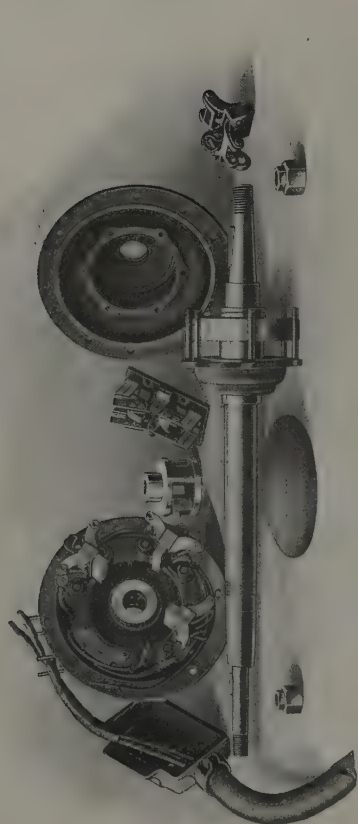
Main Units Ball Bearing Generator Showing Commutator End Housing at Left with Pole Changer Cap Removed, Trip Carrier Complete with Trip, Pole Changer Switch, Pulley End Housing, Shaft with Ball Bearing Brush Holder, Brushes and Commutator End Cap.
